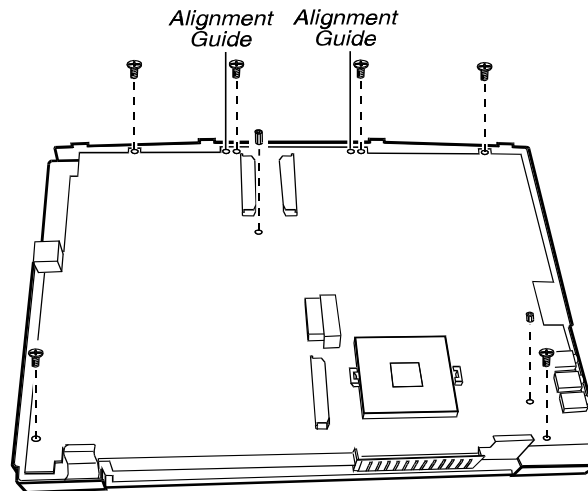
REMOVING THE SIX SCREWS AND TWO HEXNUT SCREWS FROM SYSTEM BOARD
